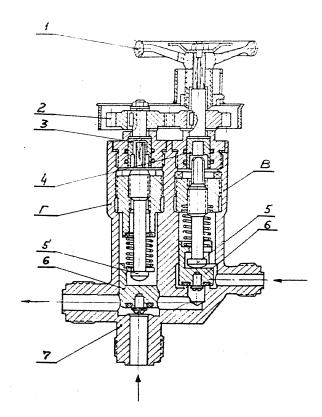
Interlock Valve I—handwheel; 2—gears; 3—shaft; 4—shaft; 5—spindle; 6—plate; 7—body
